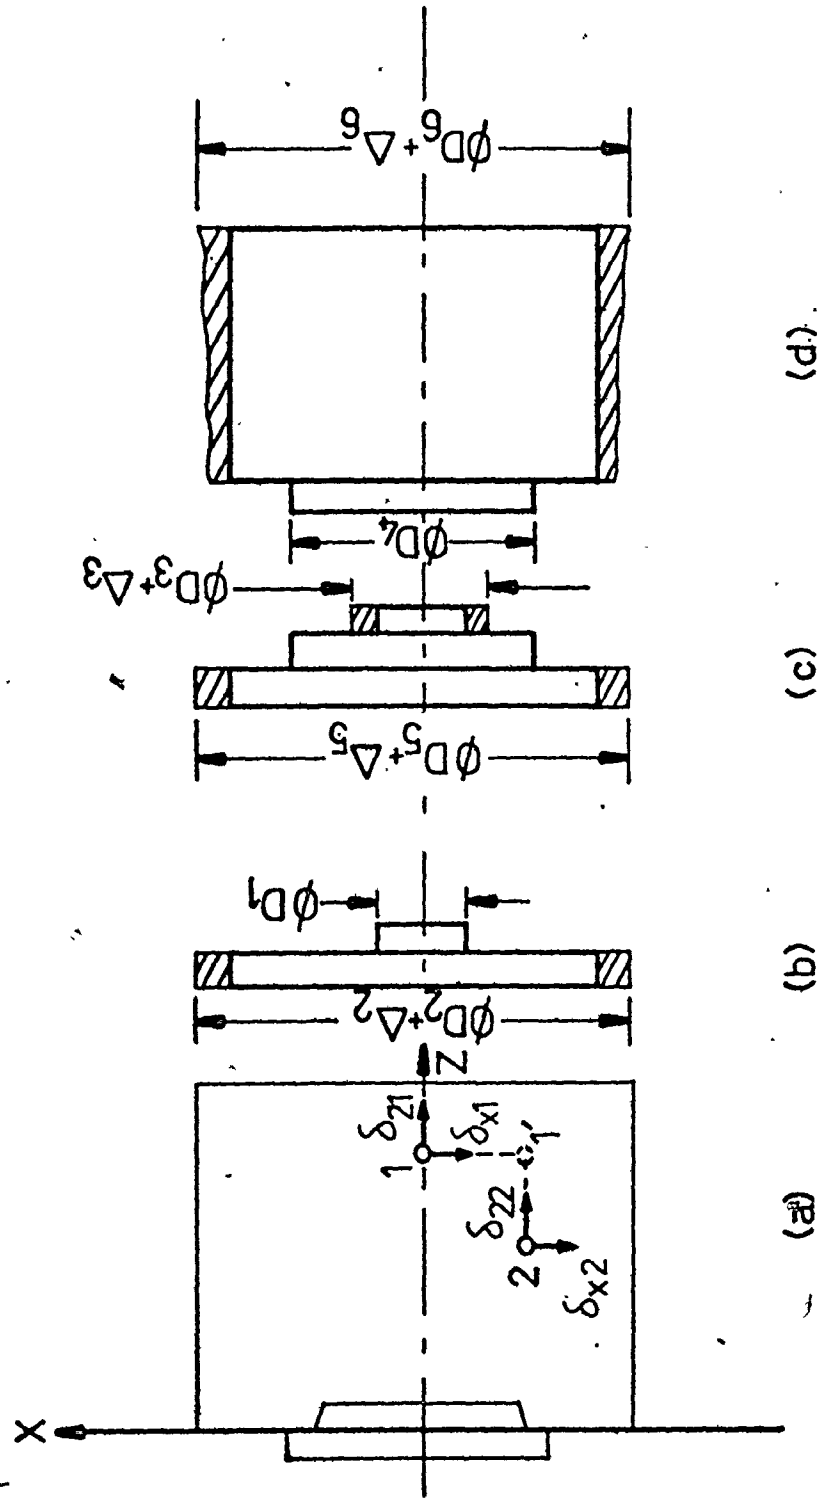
Tolerancing Principles in a Two Dimensional Zone
